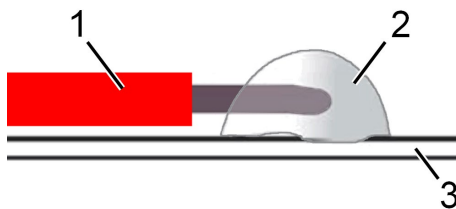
Solder connection [2] of stranded wire [1] and electrode [3]
